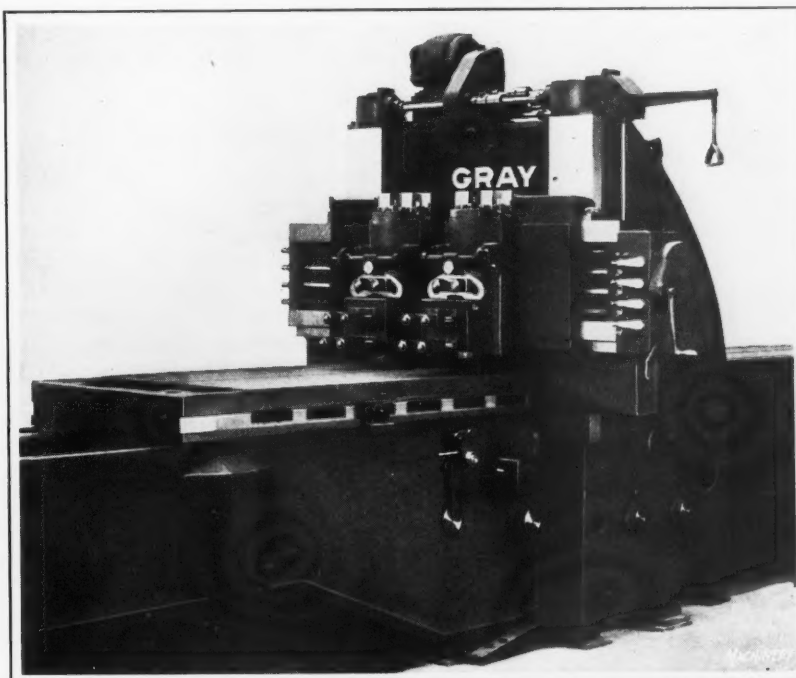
Gray Planer designed for Heavy-duty Work in building Railroad Switches
